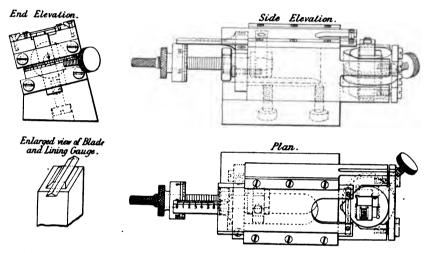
Micrometer measurer for punches and type. Scale: half size.
